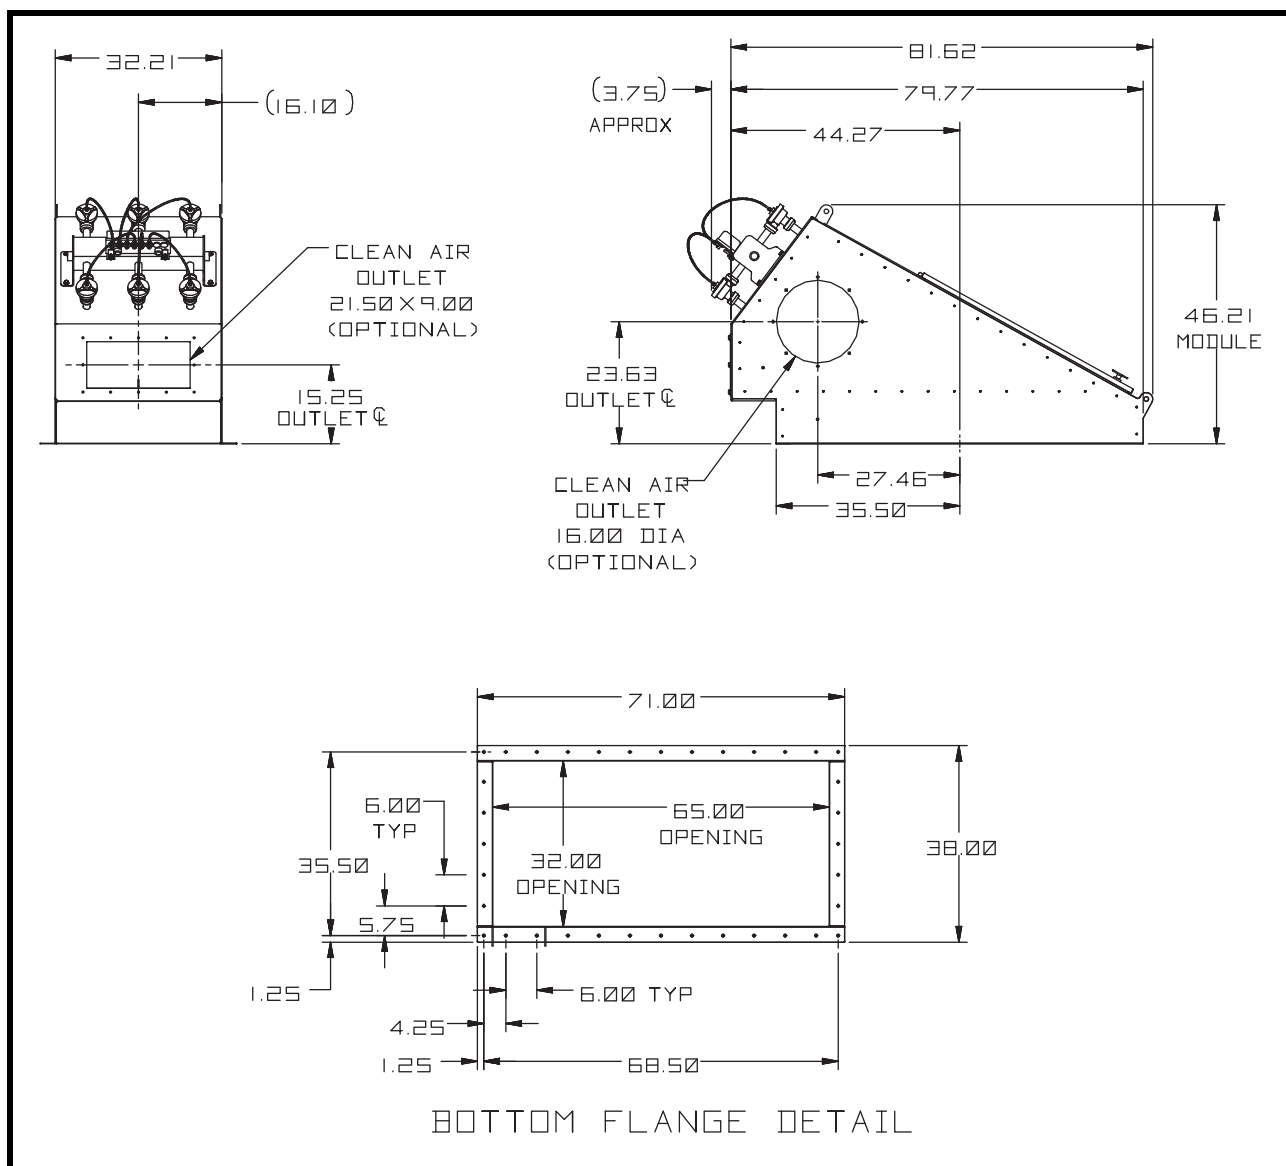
Dimensions for MARTIN® Insertable Dust Collector, P/N INS-30XX
